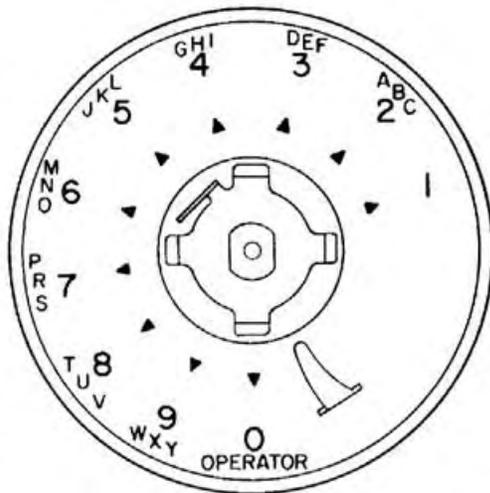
Proper Position of Clamping Disc When Installing the D-780896-A Fingerwheel.
